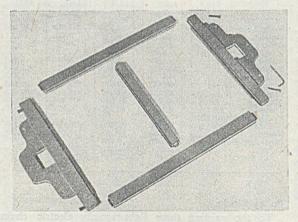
Sections used for the Assembly of a Matchplate Frame.
